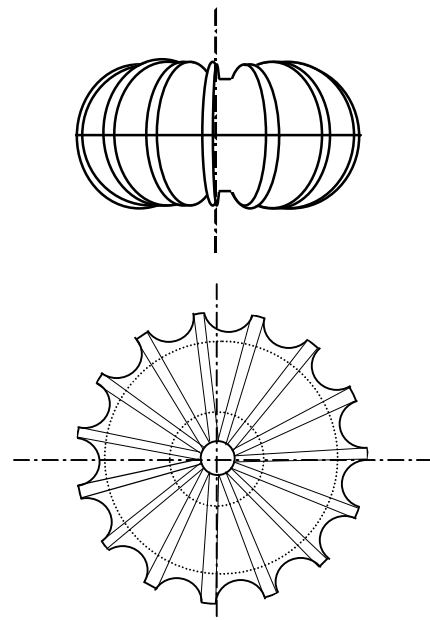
Side and upper views of a SMC transformer presenting a cylindrical symmetry and equipped with “magnetically active” fins
